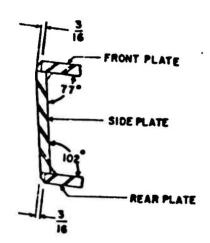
Cross Section of Applique Section Fabricated with Structural Type Weld Joint.
